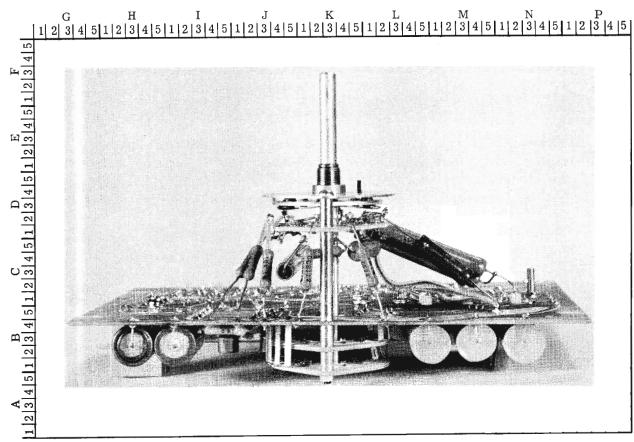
AMPLIFIER P/C ASSEMBLY (Sheet 2 of 2)
